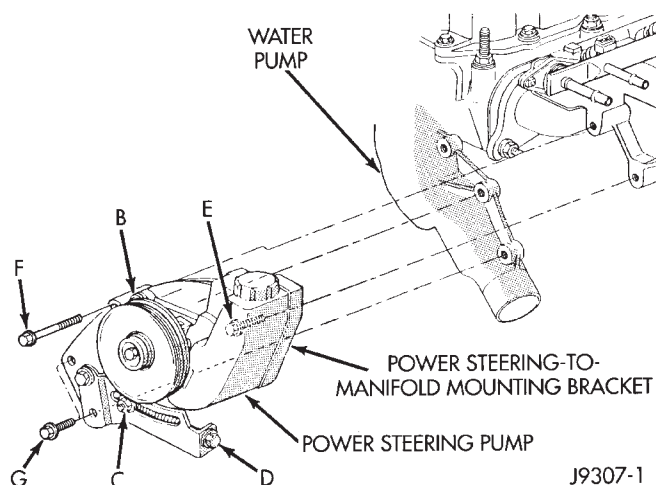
Bracket Mounting Bolts—4.0L Engine
